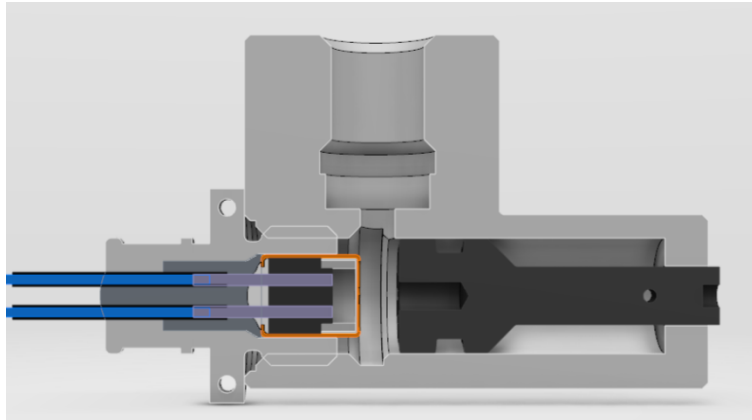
Closed bomb model of the pyrotechnic explosive bolt
